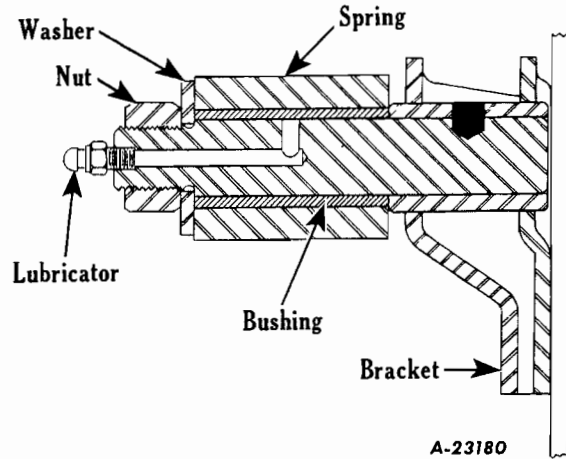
Rear Spring Front Bracket For Models L-130, LB-140, LM-150.
